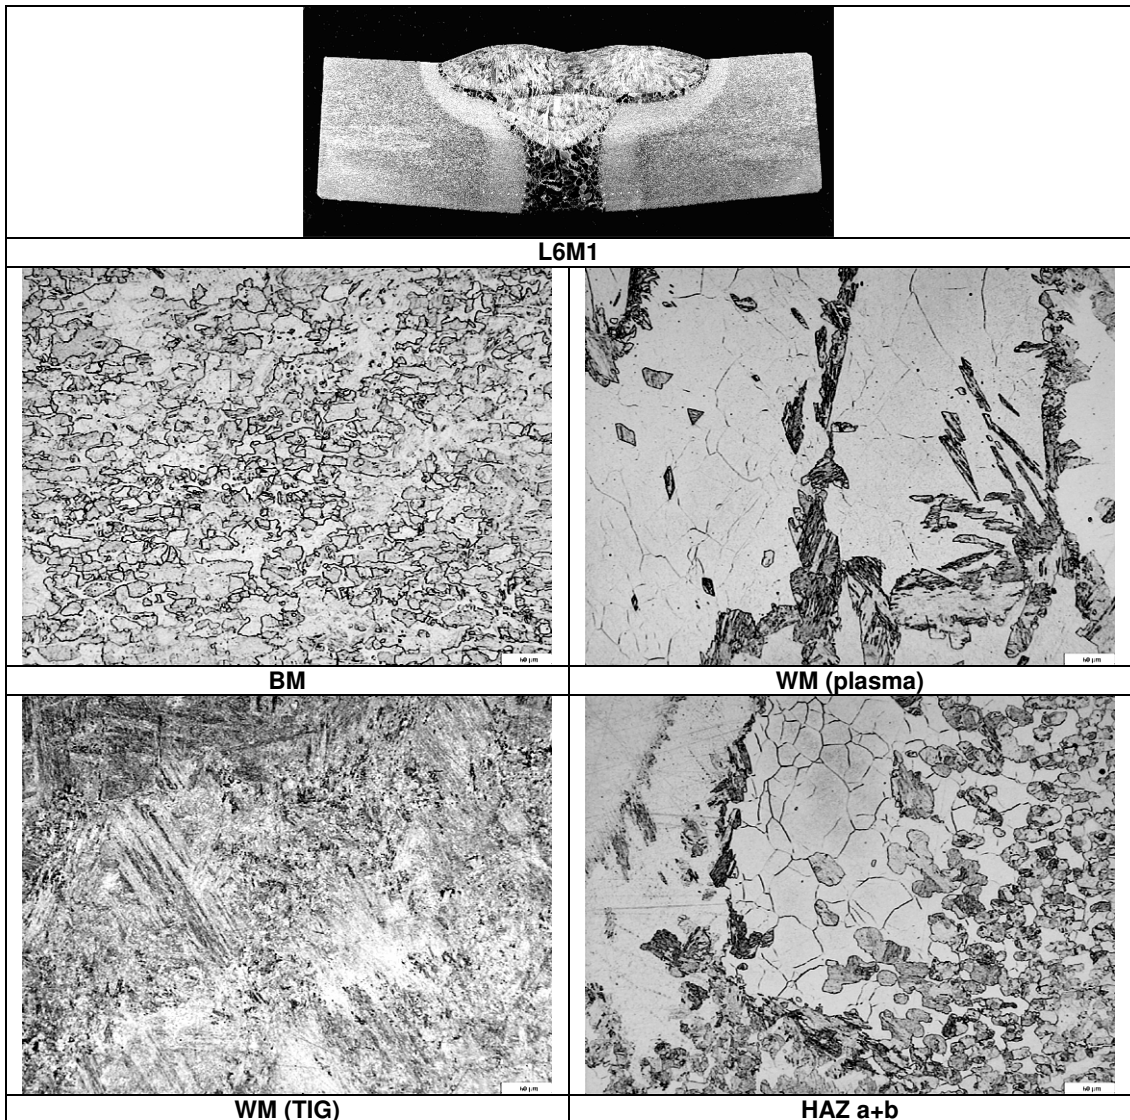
Macro and microphotographs of 12 mm thick PLASMA + TIG weld with 316 filler metal (L6).
